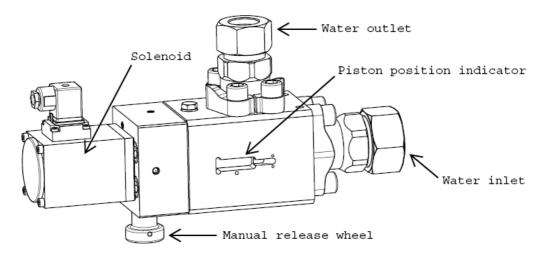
Machinery section valve (extracted and modified from Marioff Corporation Oy's internal documentation)
